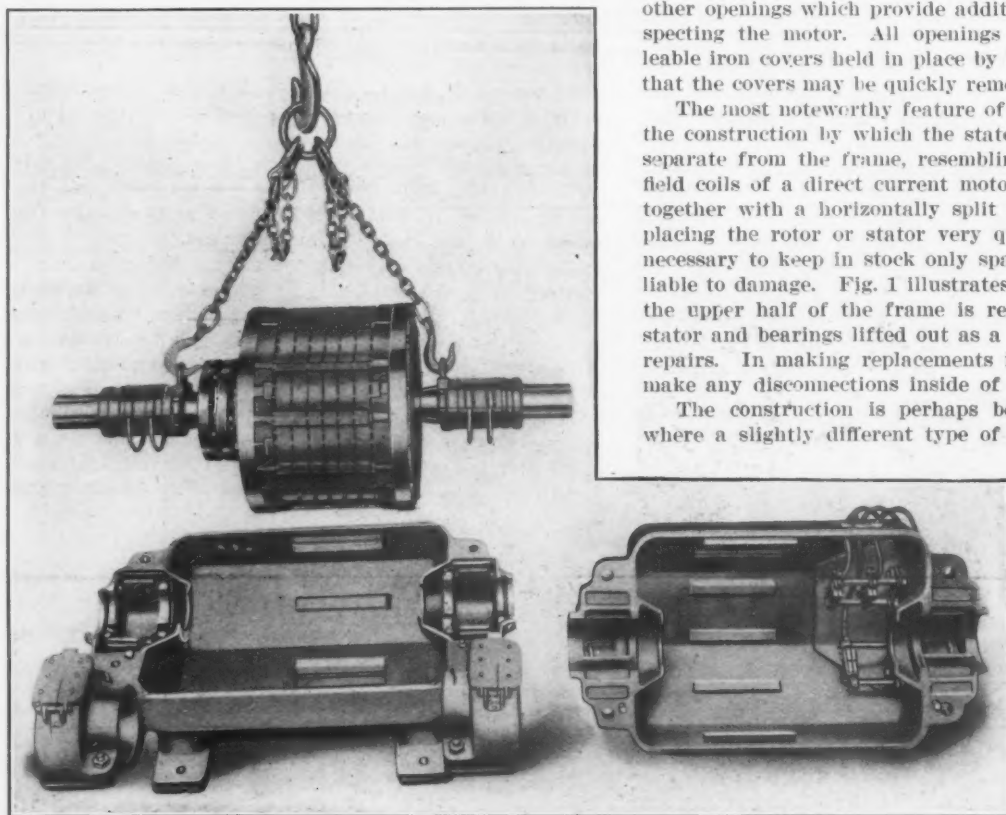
An M I Alternating Current Mill Motor Made by the General Electric Company, Schenectady, N. Y., Showing the Manner of Removing the Rotor and Stator from the Frame as a Unit.
